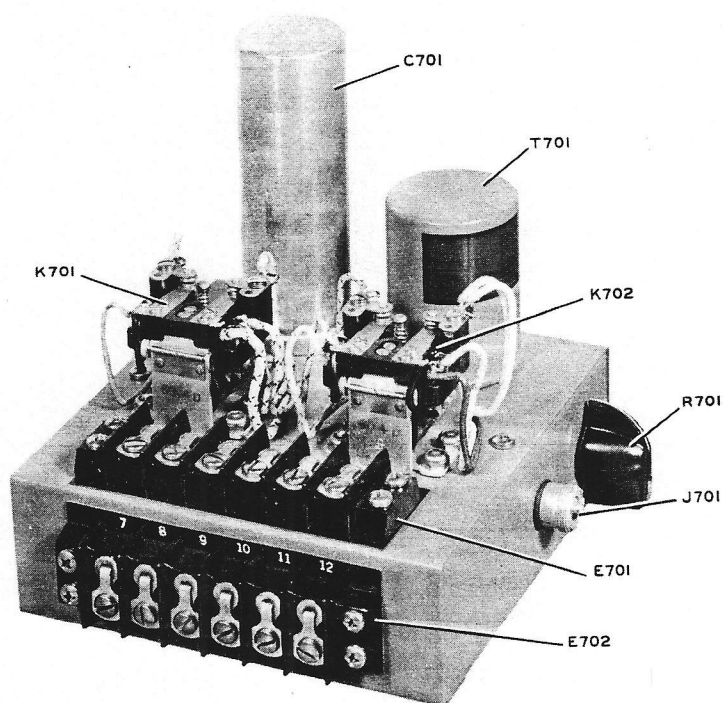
Type 175V-2 Relay Unit, Parts Arrangement - Top
